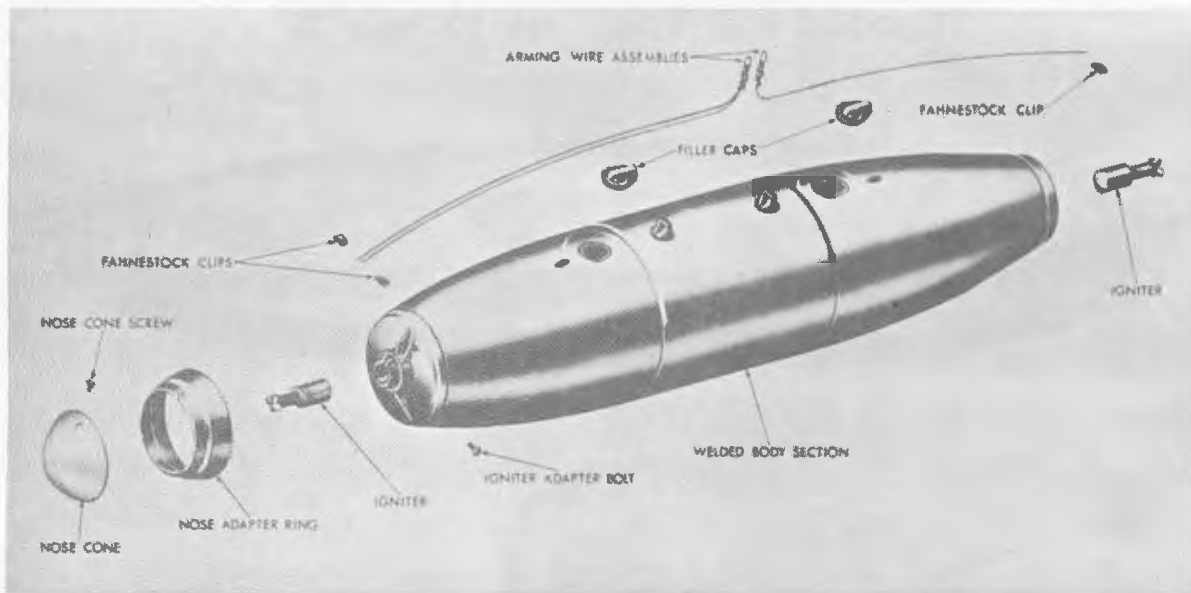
B—500-lb Fire Bomb Mk 77 Mod 2, Exploded View.
